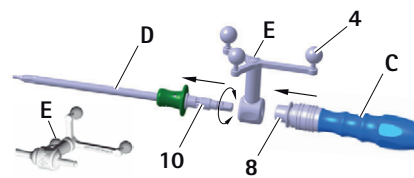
Mounting the reference star unit ("calibration with ICM 4") and S<sup>4</sup>C handle (FW067R or FW165R) onto the S<sup>4</sup>C screwdriver
